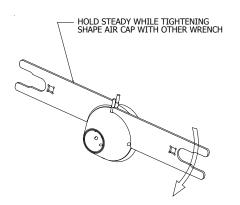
RPM-79 and RPM-80 Assembly (30mm)
